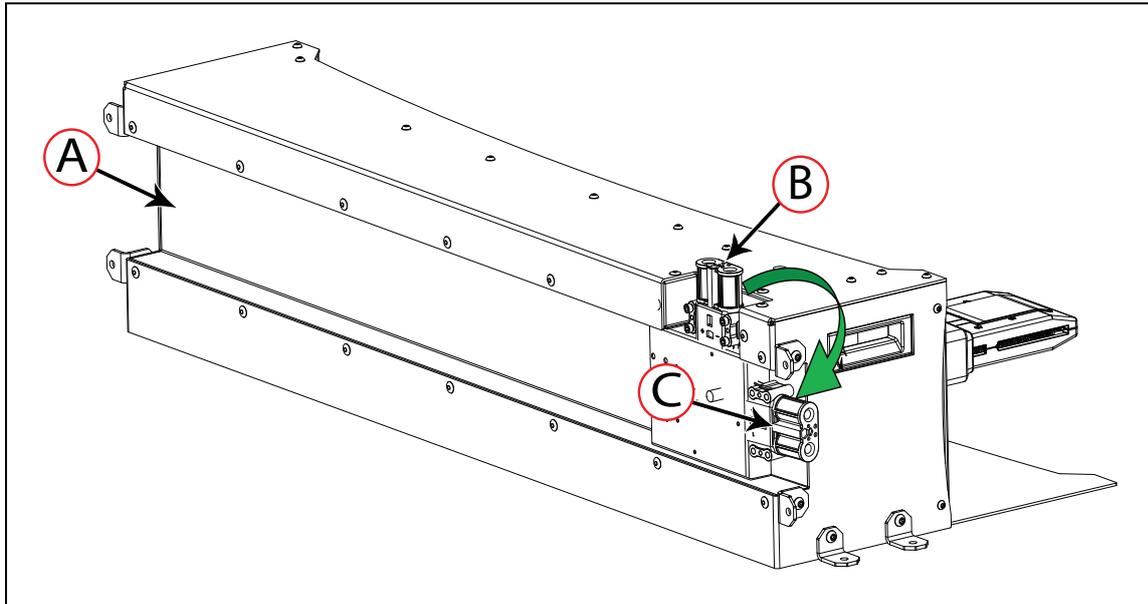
Rear View of the Docking Target, (A) Cut Out Groove For Side-way Connection, (B) Power Connector Installed Vertically, and (C) Power Connector Installed Horizontally
